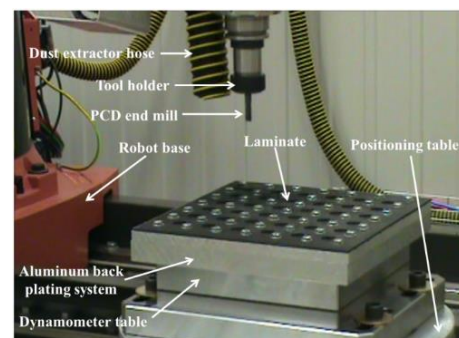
Experimental Setup for Robotic Trimming of CFRP Components
